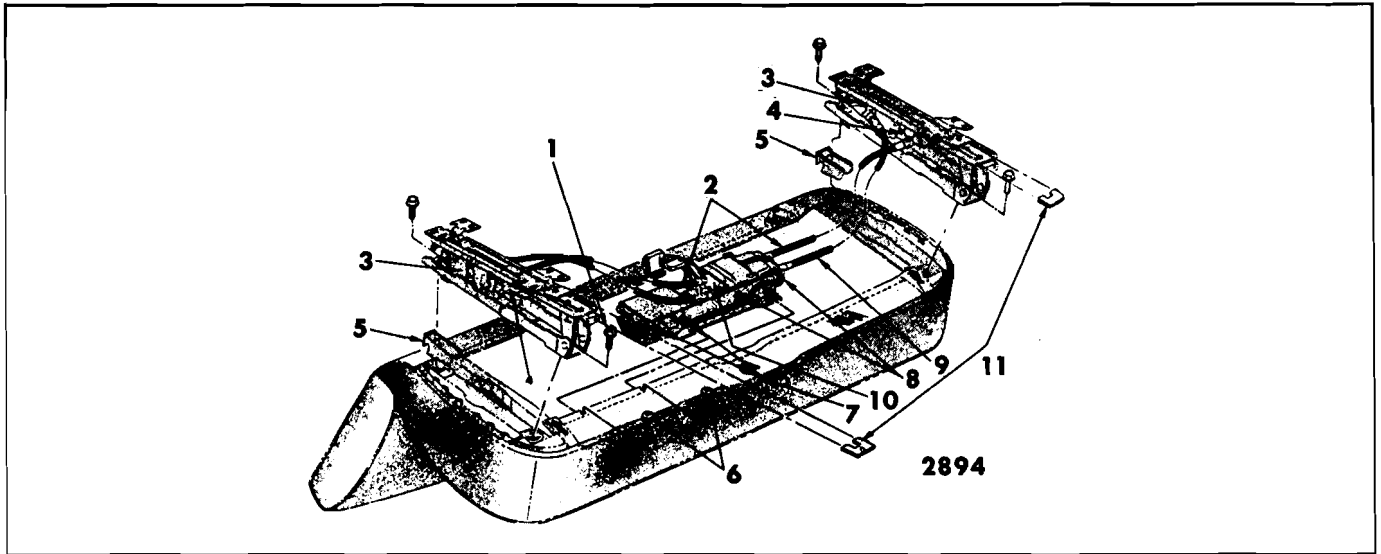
Front Seat Assembly - Four-Way Tilt - Buick "B, C & E" Styles
